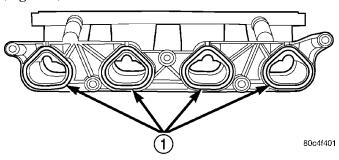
Lower Intake Manifold Seals - Naturally Aspirated Engine
